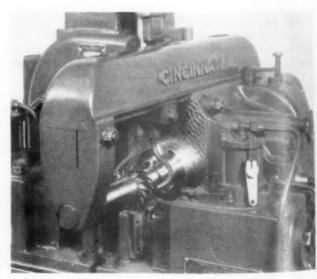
Compressed air clamping duplex fixture on a rise and fall milling machine
